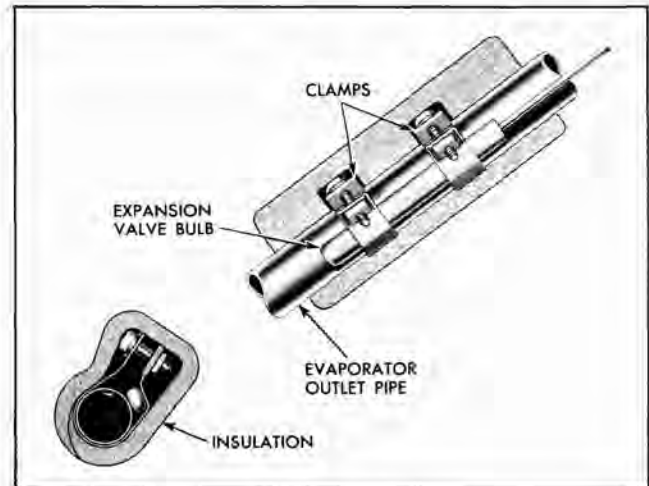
Thermostatic Expansion Valve Bulb at Evaporator Outlet Pipe
